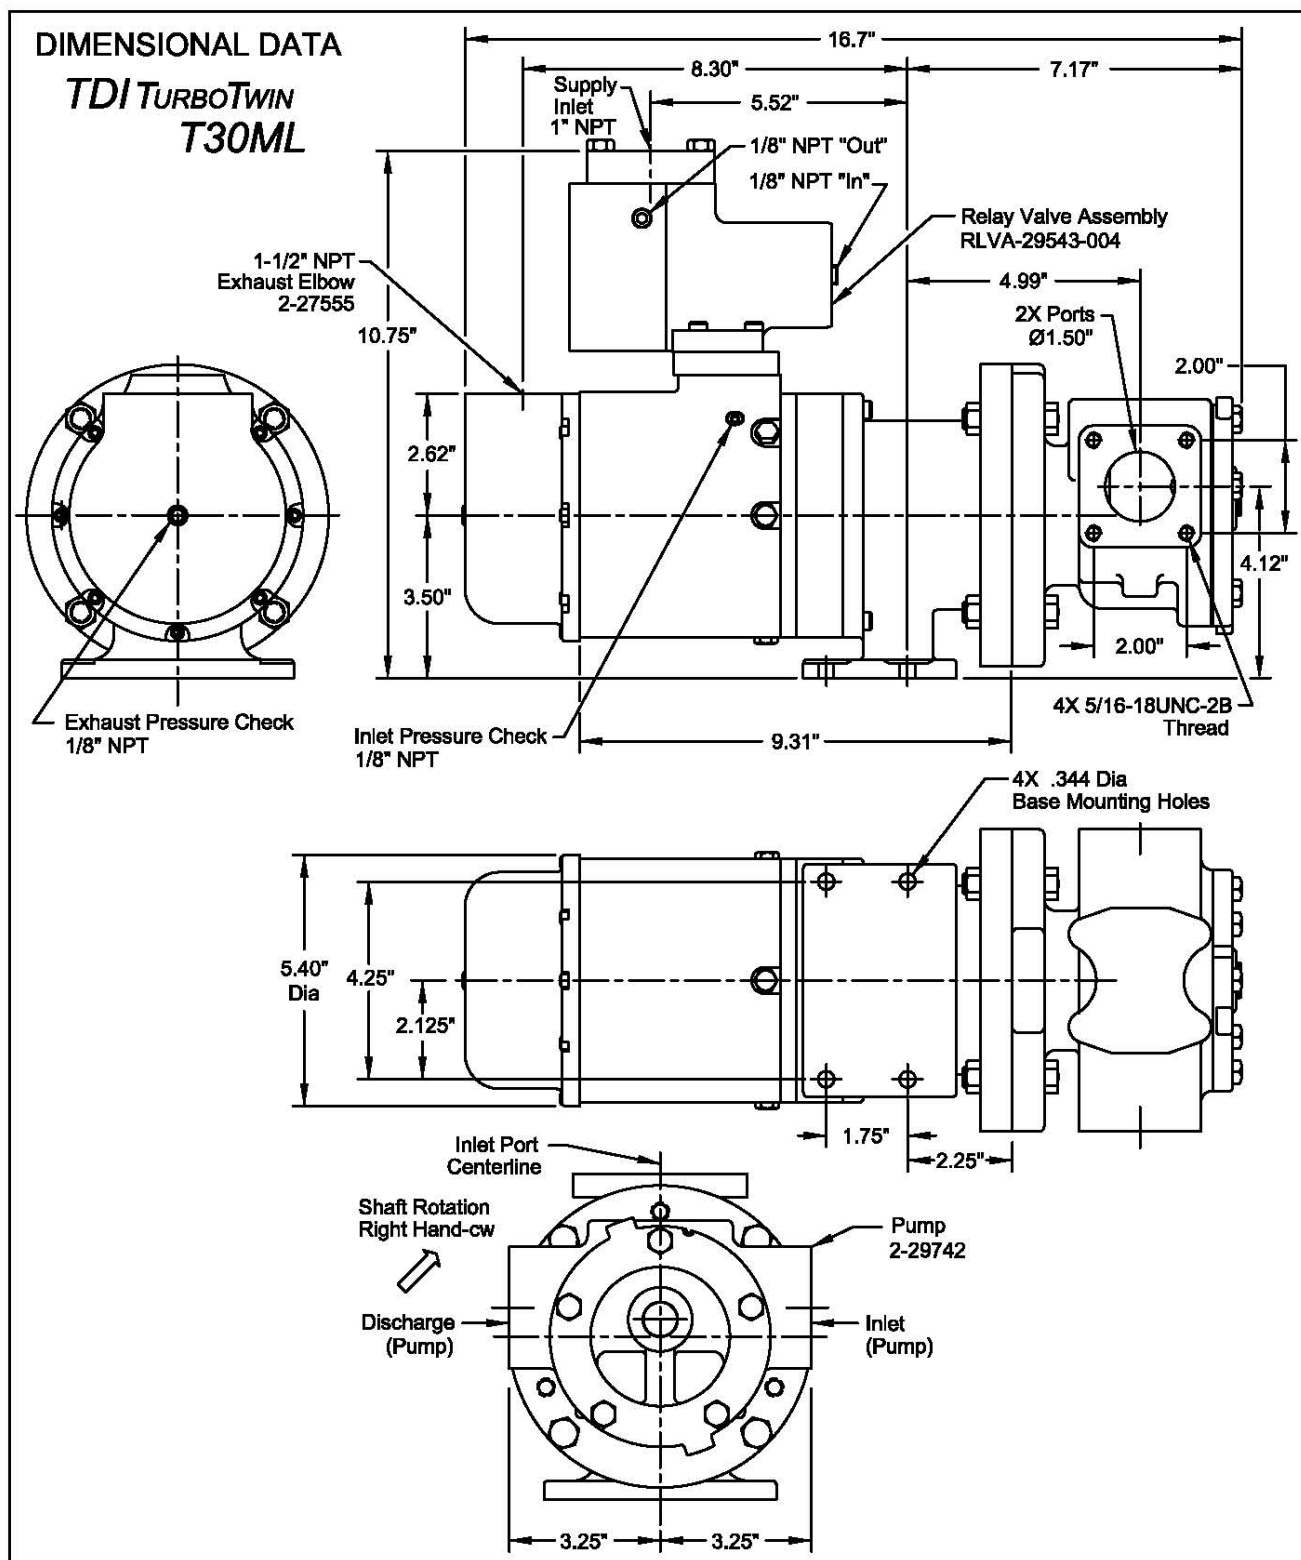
T30-M Lube Pump Motor w/Integral Relay Valve (Pneumatic)
